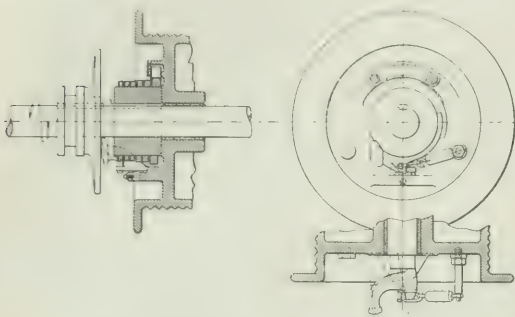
COIL-CLUTCH FITTED TO CRANE BARREL.
